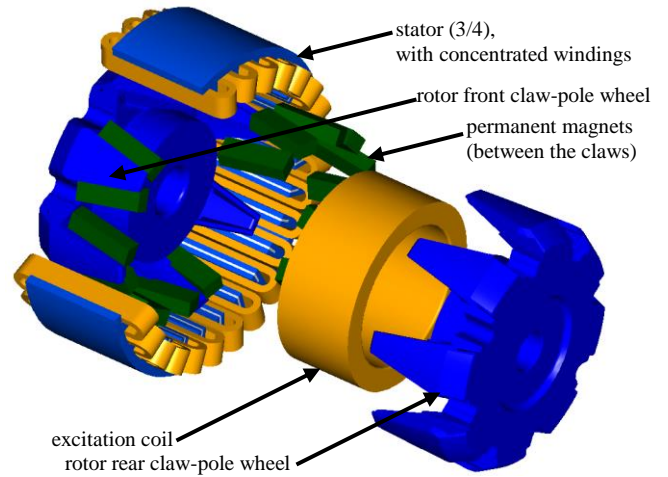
Exploded view of the multiphase claw pole starter-alternator
